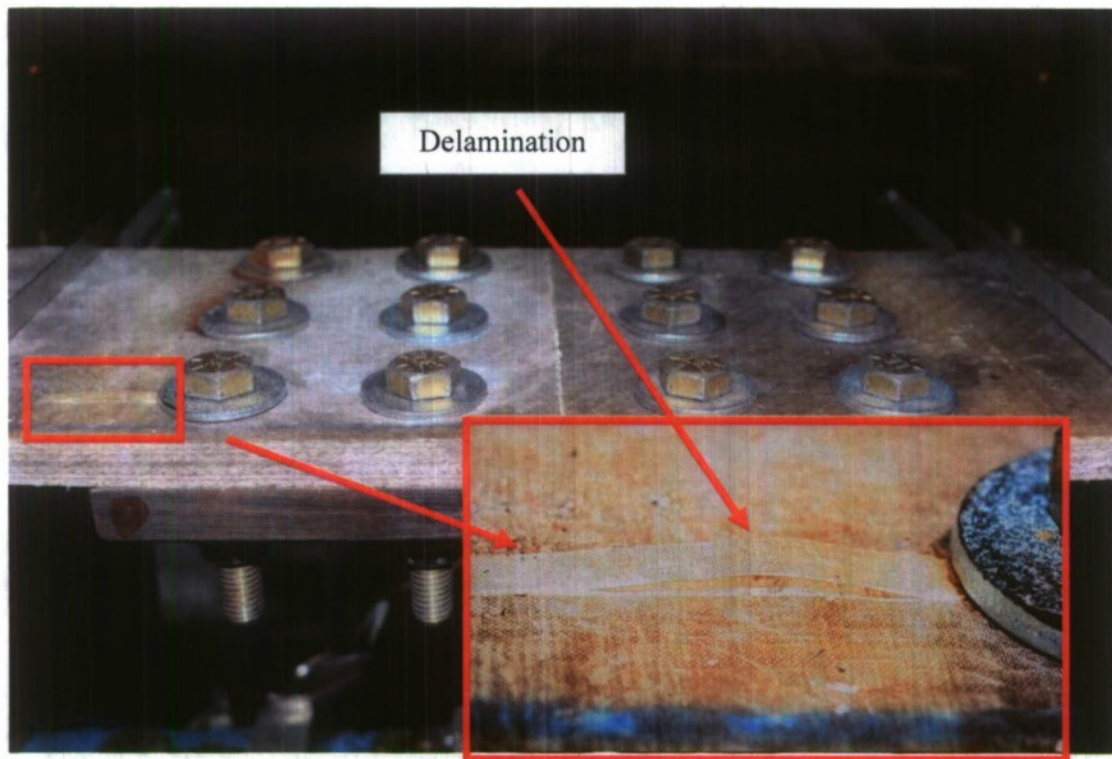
28-Ply Bolted Joint 7kip Fatigue Test 3 Failure Photo
